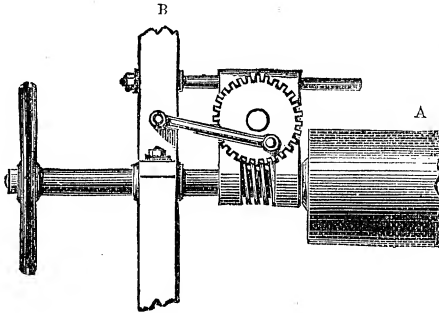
A, Ink-drum ; B, Frame of Machine.
